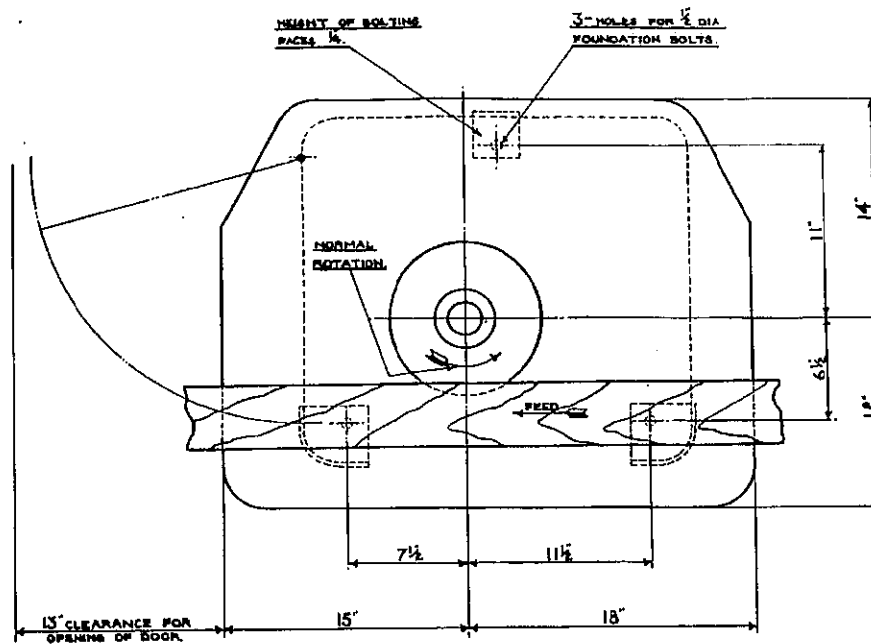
PLAN OF SPINDLE MOULDER TYPE B.E.N.
